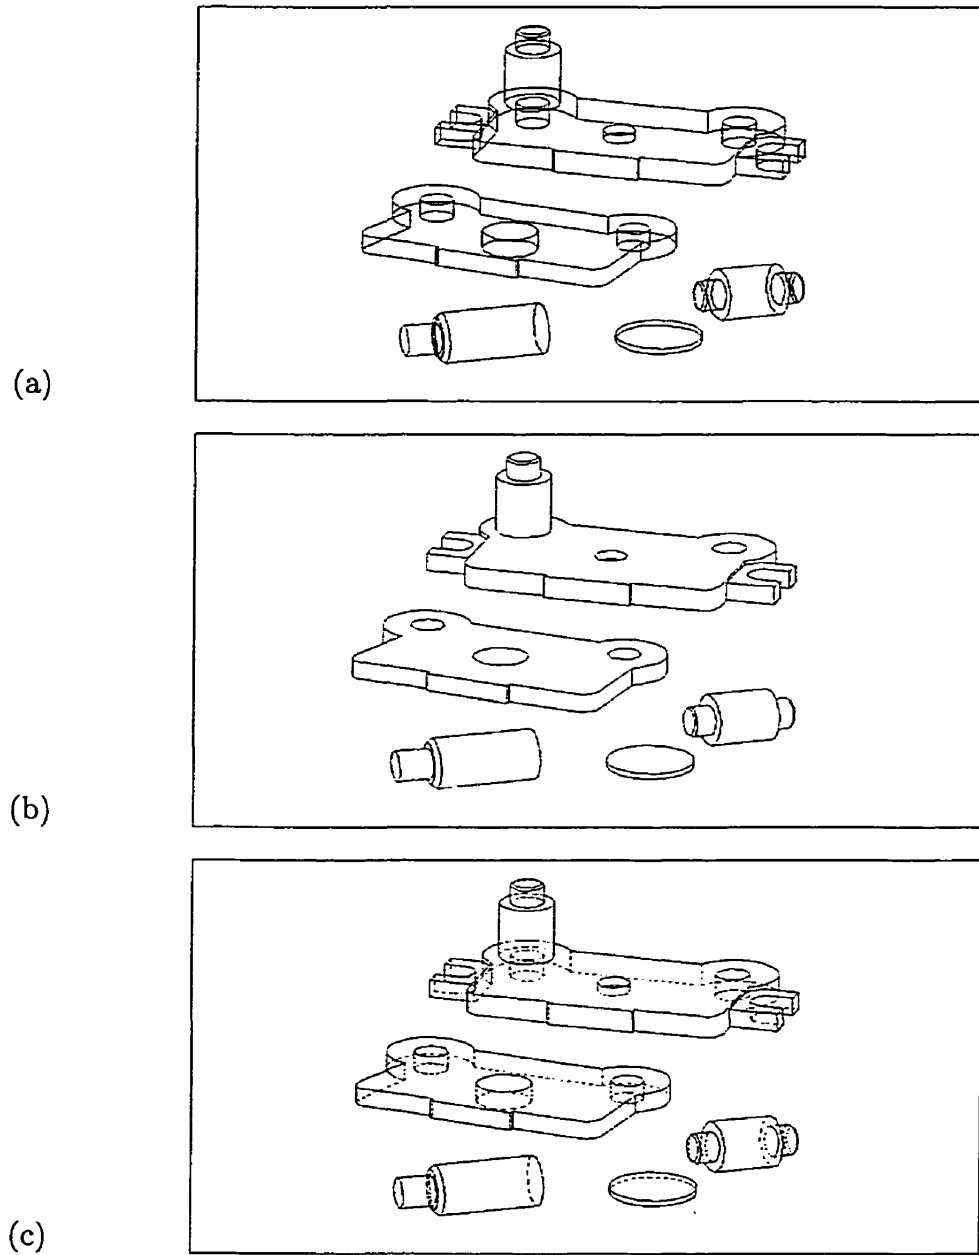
Wireframe, Z-Buffer and D-Buffer Images of Machine Pieces
